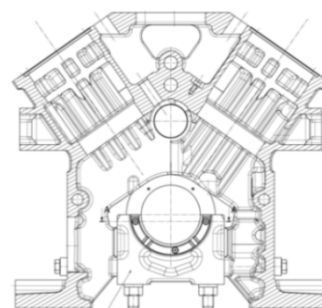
Remachined big-end bearing cap with part no. 9016817
